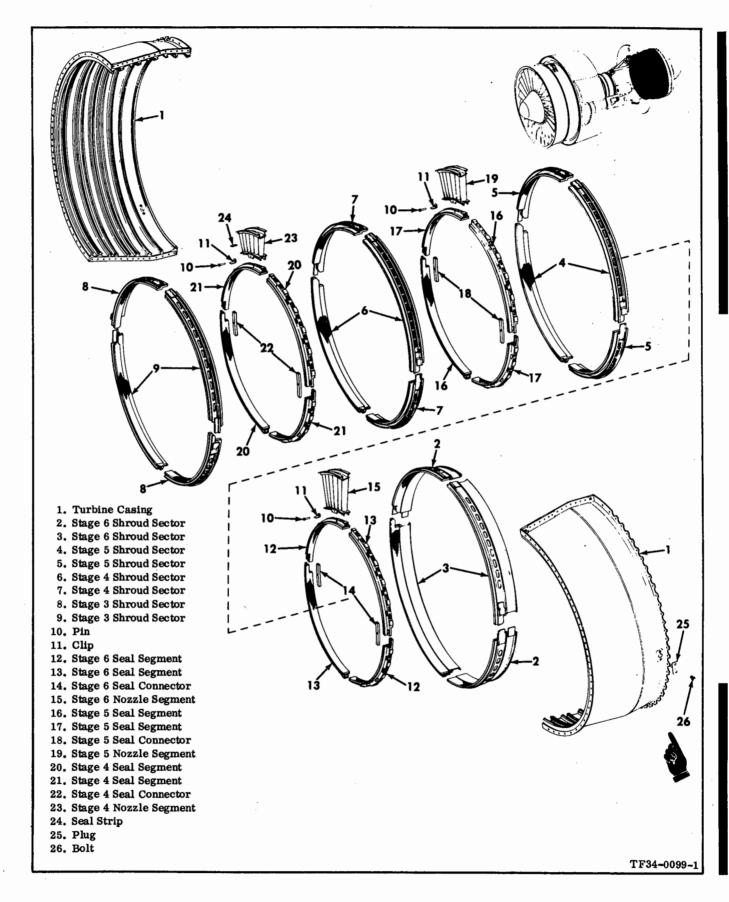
Disassembly of Low-Pressure Turbine Stator
